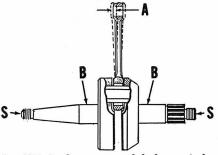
Support crankshaft on lathe centers at point (S) and use dial indicators at point (B) to measure crankshaft runout.
